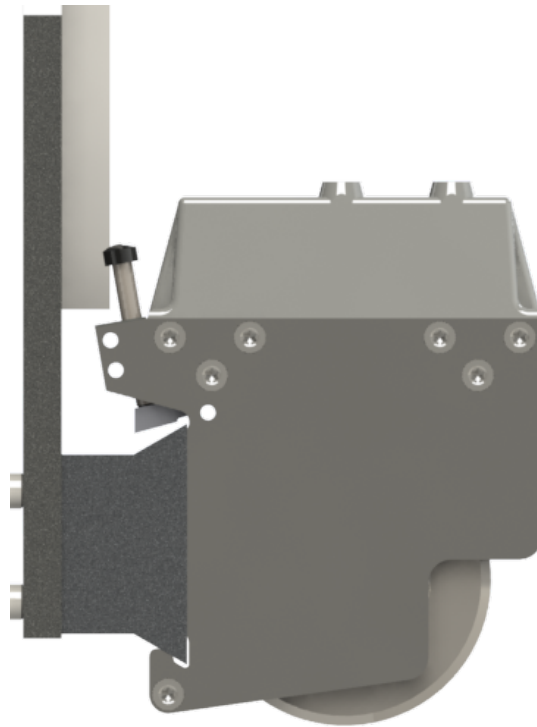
Dienes Cutter with dovetail mounting scheme.
